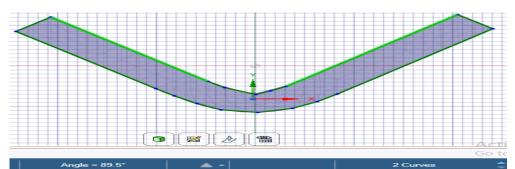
Measurement of springback angle after bending of 5mm sheet in 22milimeter die opening and 0 holding time.
